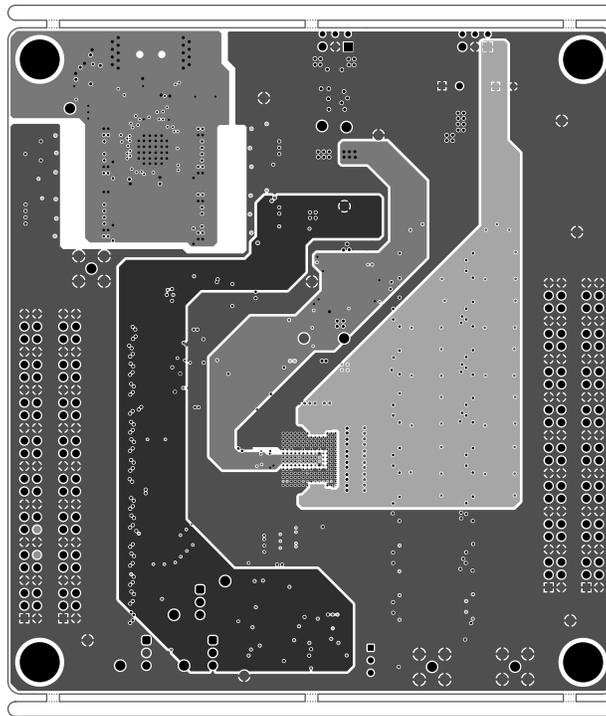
PCB Layer 1 (Top Assembly Drawing)
